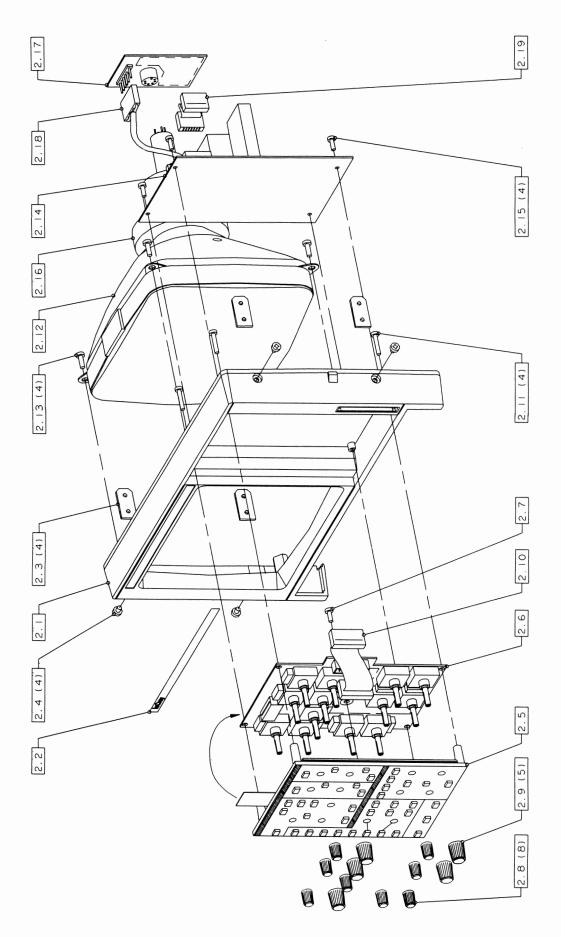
9320 FRONT FRAME EXPLODED VIEW
